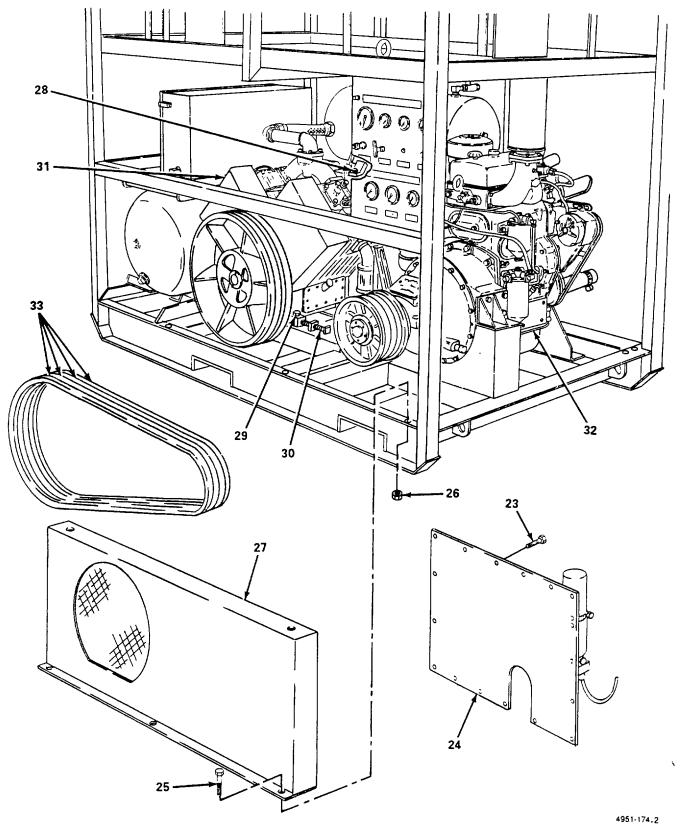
Engine Assembly, Installation (Sheet 3 of 4).
